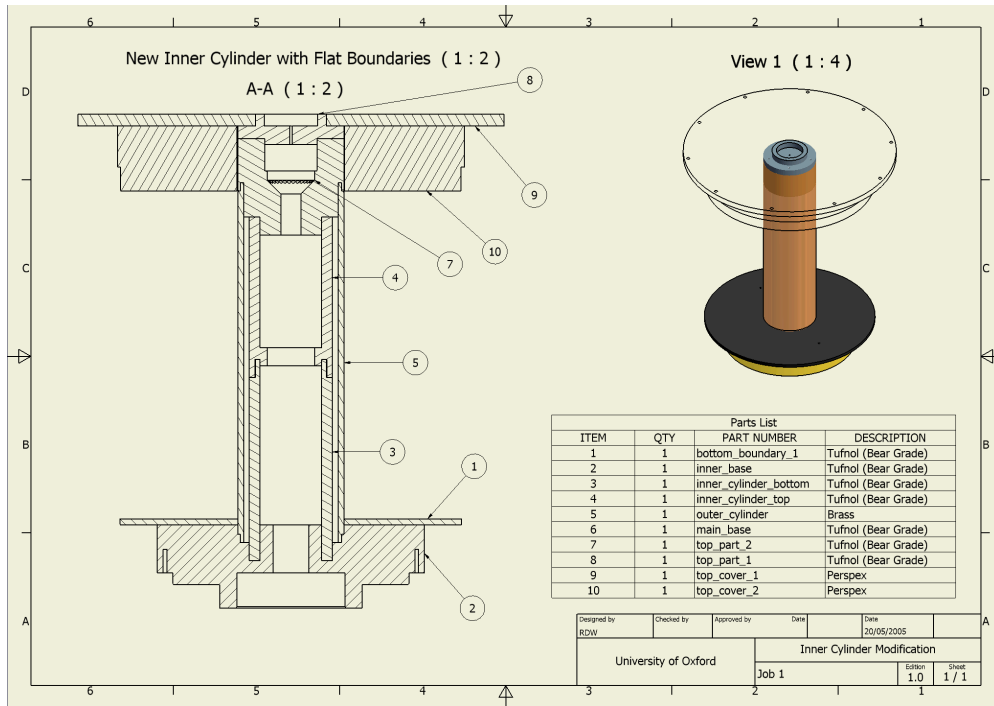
Technical drawing of the modified inner cylinder for the flat boundary case.
